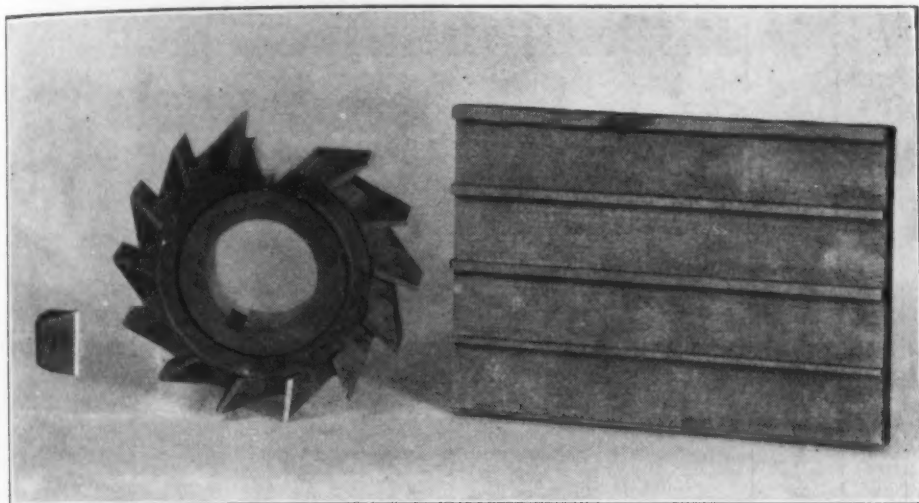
Photograph Showing one of the Test Cutters with Tooth Removed for Examination. Longitudinal section showing surface of test log is also shown.
